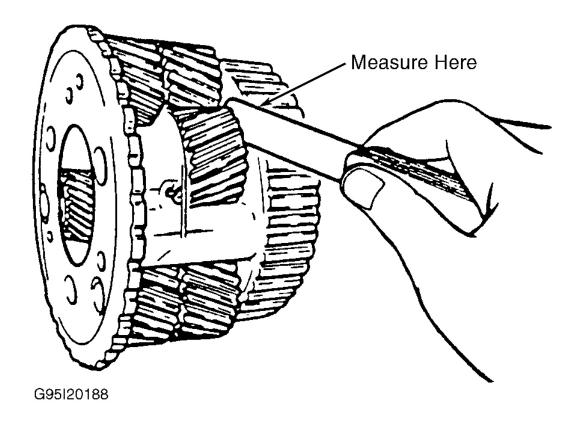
Measuring Pinion Gear To Thrust Washer Clearance Courtesy of MAZDA MOTORS CORP.
